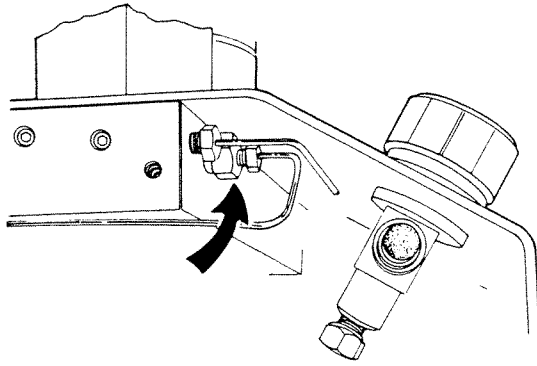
CHAMBER FILTER FITTING (LEFT END COVER REMOVED)
